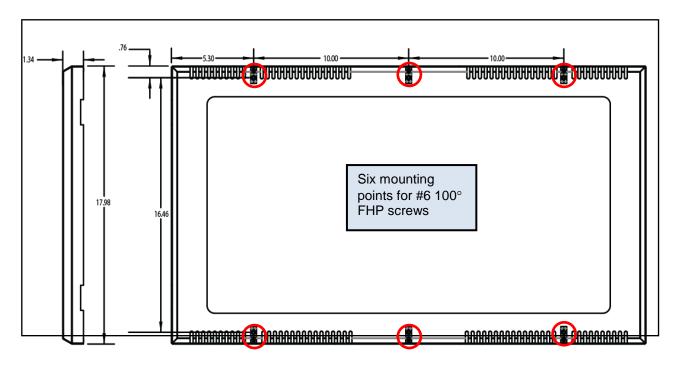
Rear view of a 32" cosmetic back mounting holes 3201-800
